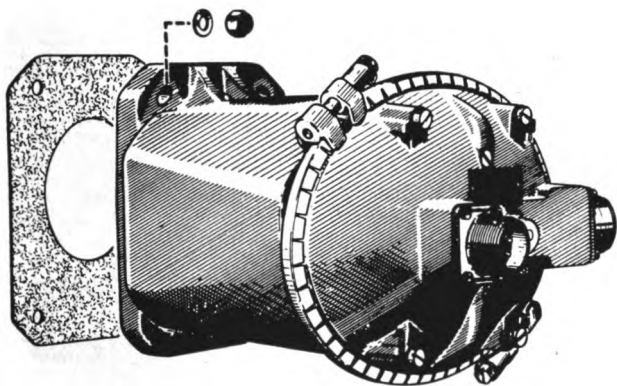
Scintilla DLN-9 magneto used on model R-3350-24W engines.
